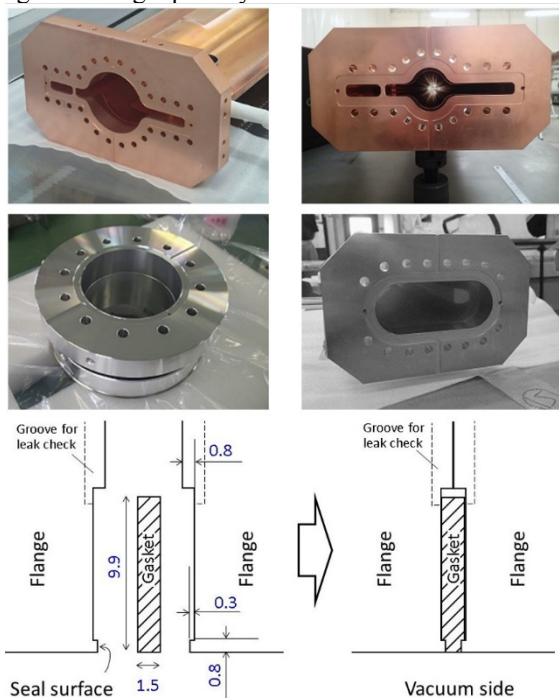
Several types of the step-less MO-type flanges of the SuperKEKB.
